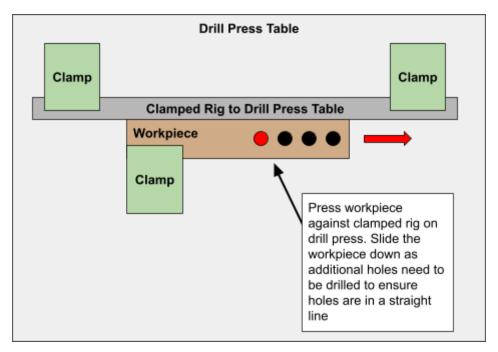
Drill press manufacturing rig for repeating holes in a single axis. Clamp a straight piece of material to the drill press table. Slide the workpiece along the rig as more holes are needed to be drilled in a single direction (as in the foot support legs, which have many ¼" holes spaced 0.75" apart). The red hole indicates the current hole being drilled, and the piece may be shifted right to drill additional holes.
